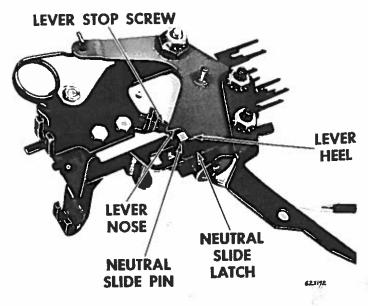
Adjusting Lever Heel to Neutral Slide Pin Clearance
